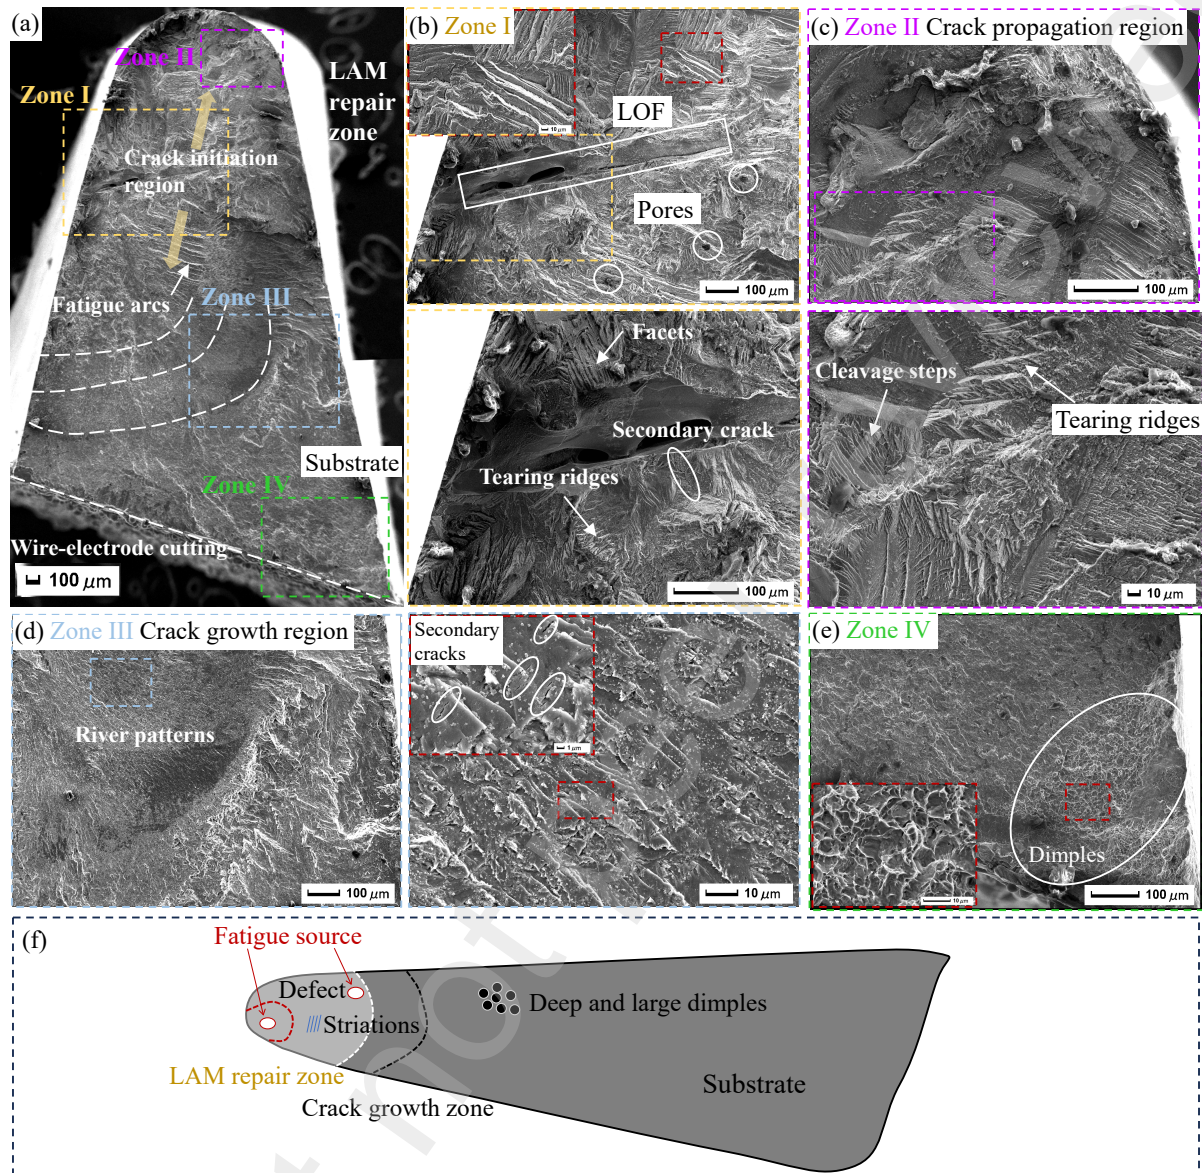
Fracture morphologies of LAM repaired TC17 simulated compressor blade: (a) Global fracture surface; (b) Crack source and initiation region; (c) Crack growth region; (d) Final fracture region. The specimen is initially loaded at 150 MPa and failed at a loading level of 210 MPa after 5.4×10^6 cycles; (f) Illustration of typical FCG characteristics of LAM repaired TC17 blade.
